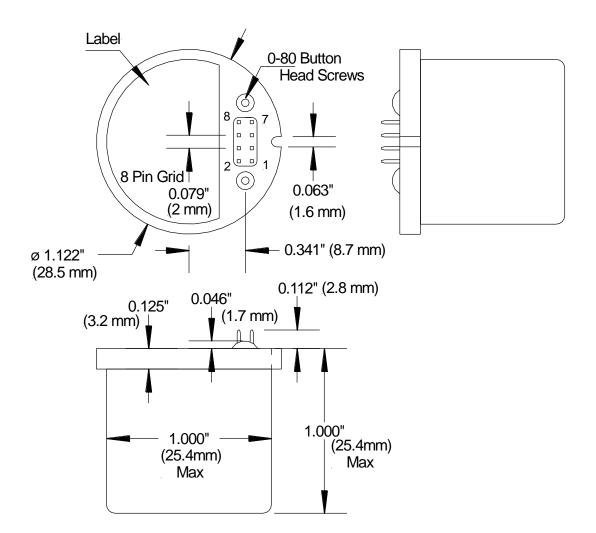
G200 Dual Axis MEMS Gyro Outline Drawing
